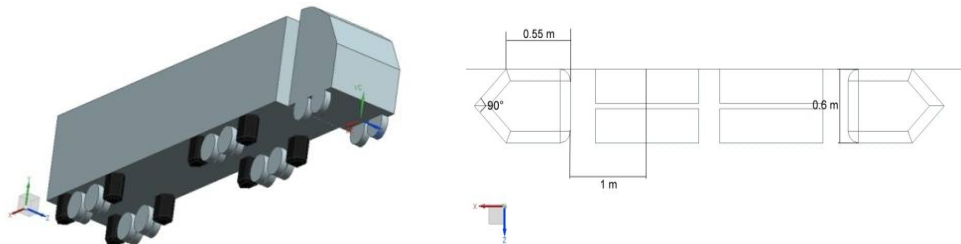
(a) Wheel air deflector 2 mountings; (b) Dimensions of the device.
